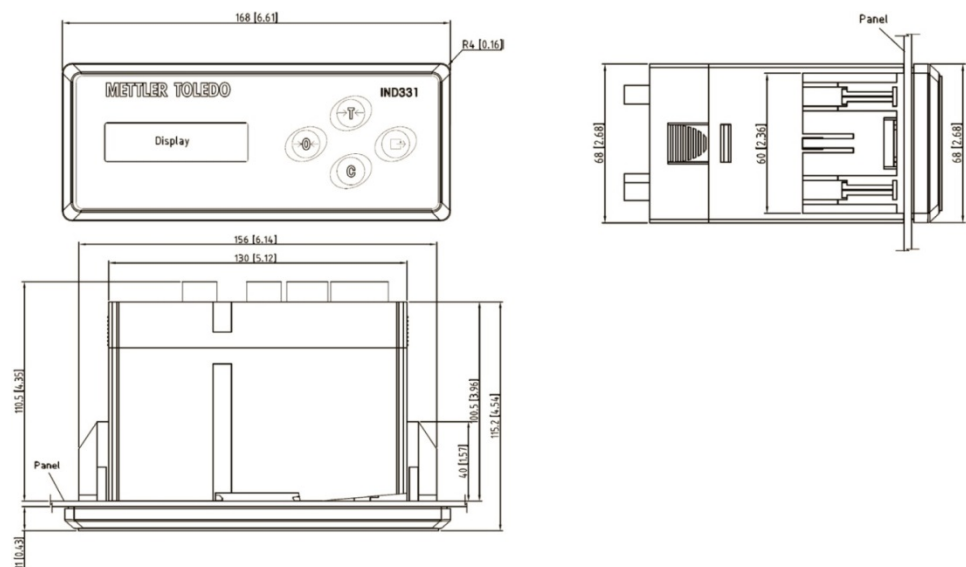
IND331 Panel Mount Enclosure Dimensions
